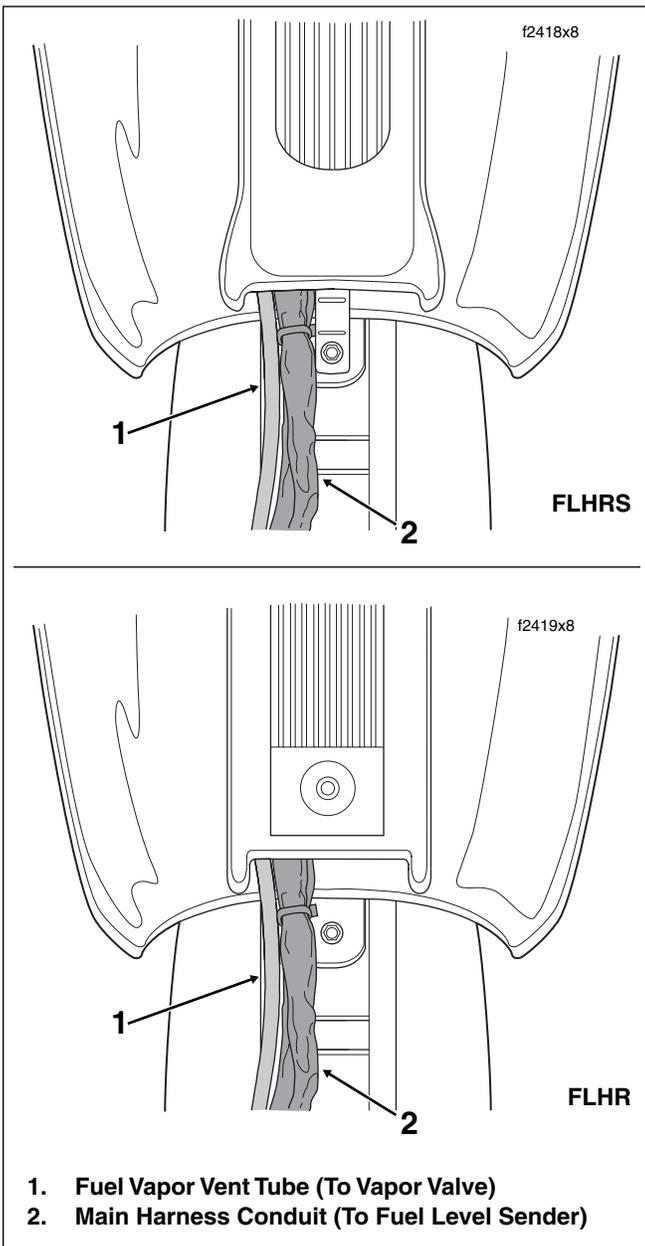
Console Cable/Hose Routing (FLHR/S)
